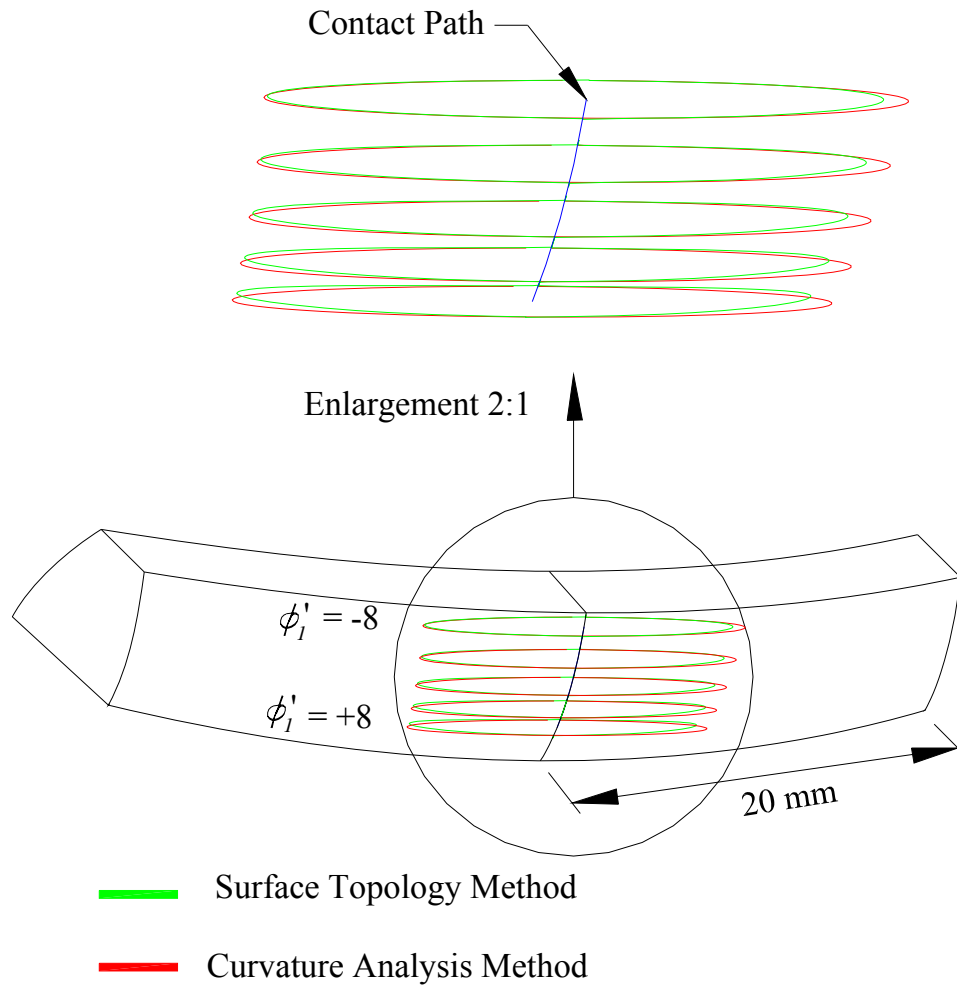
Contact ellipses and bearing contacts on the pinion surface under ideal assembly condition
